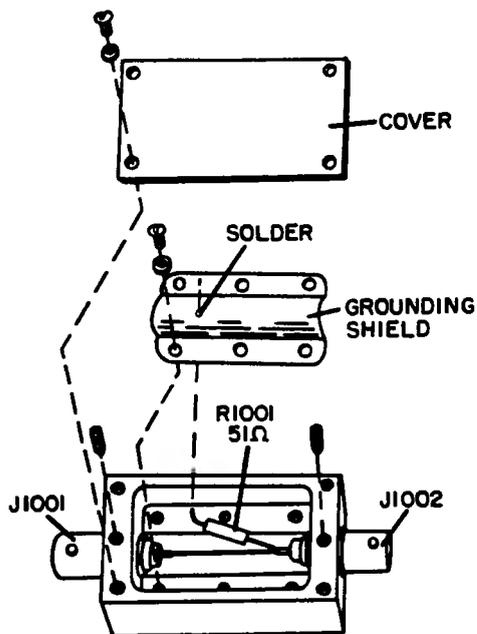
Adapter, Test MX-2079/TRM-1 (50 ohm Shunt), Exploded View
